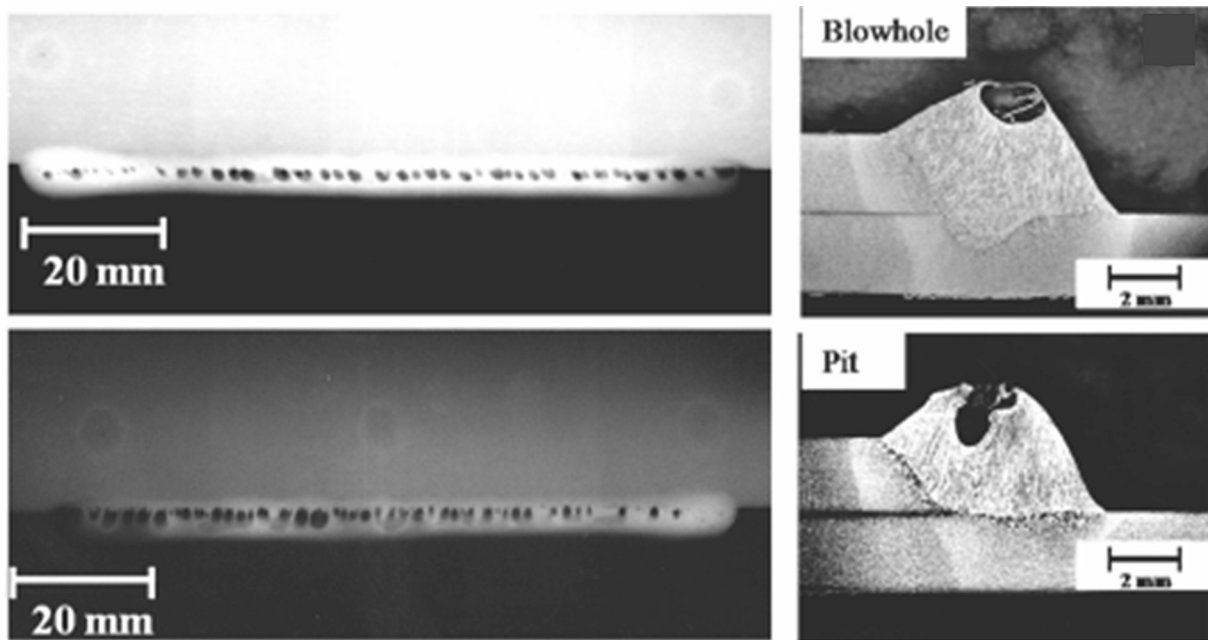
Formation of porosity (blowhole and pit) in the joints during CMT welding [48].
